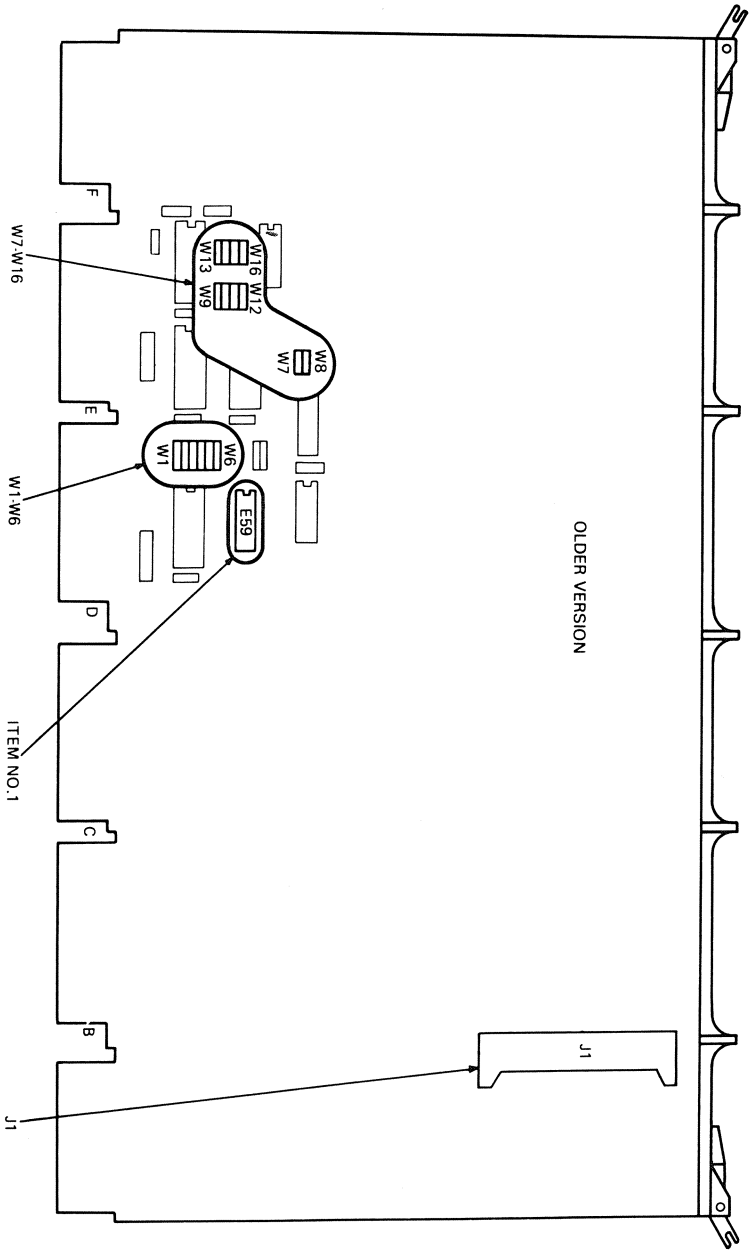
RL11 Component Layout (Sheet 1 of 2)
